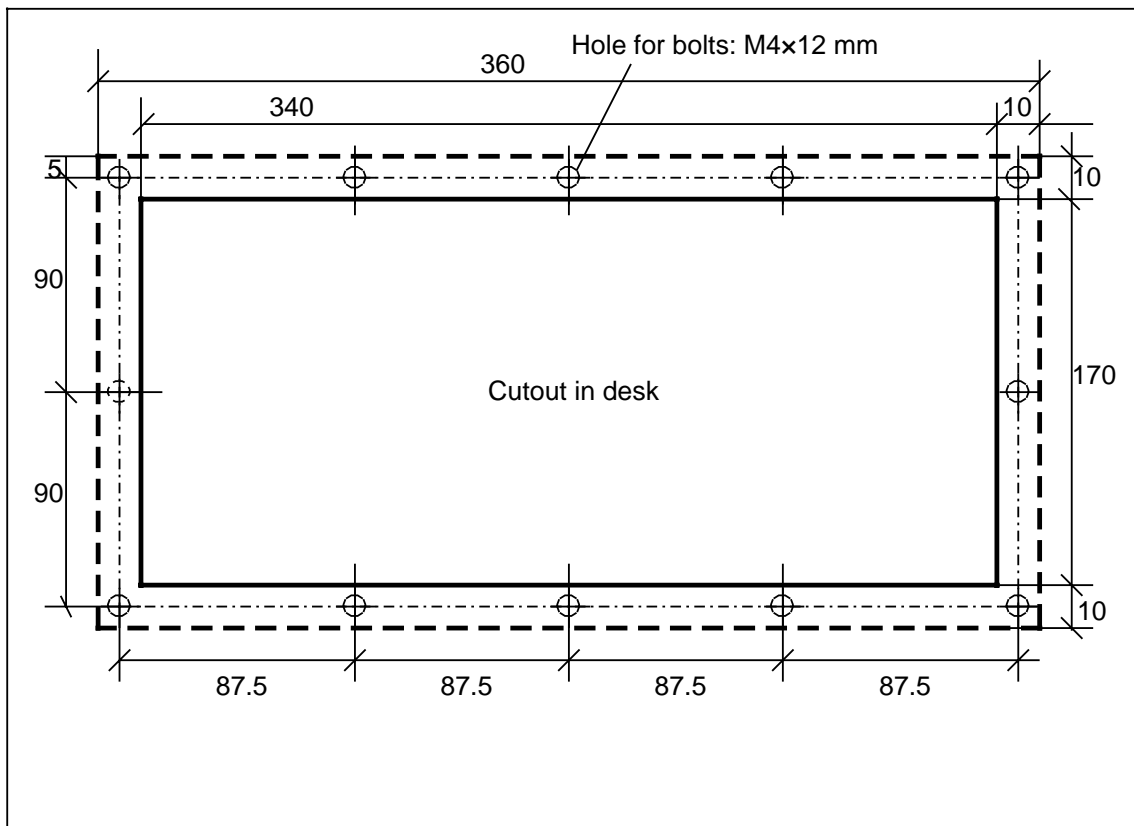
Dimensions for panel mounting of WS 495/WS 496
